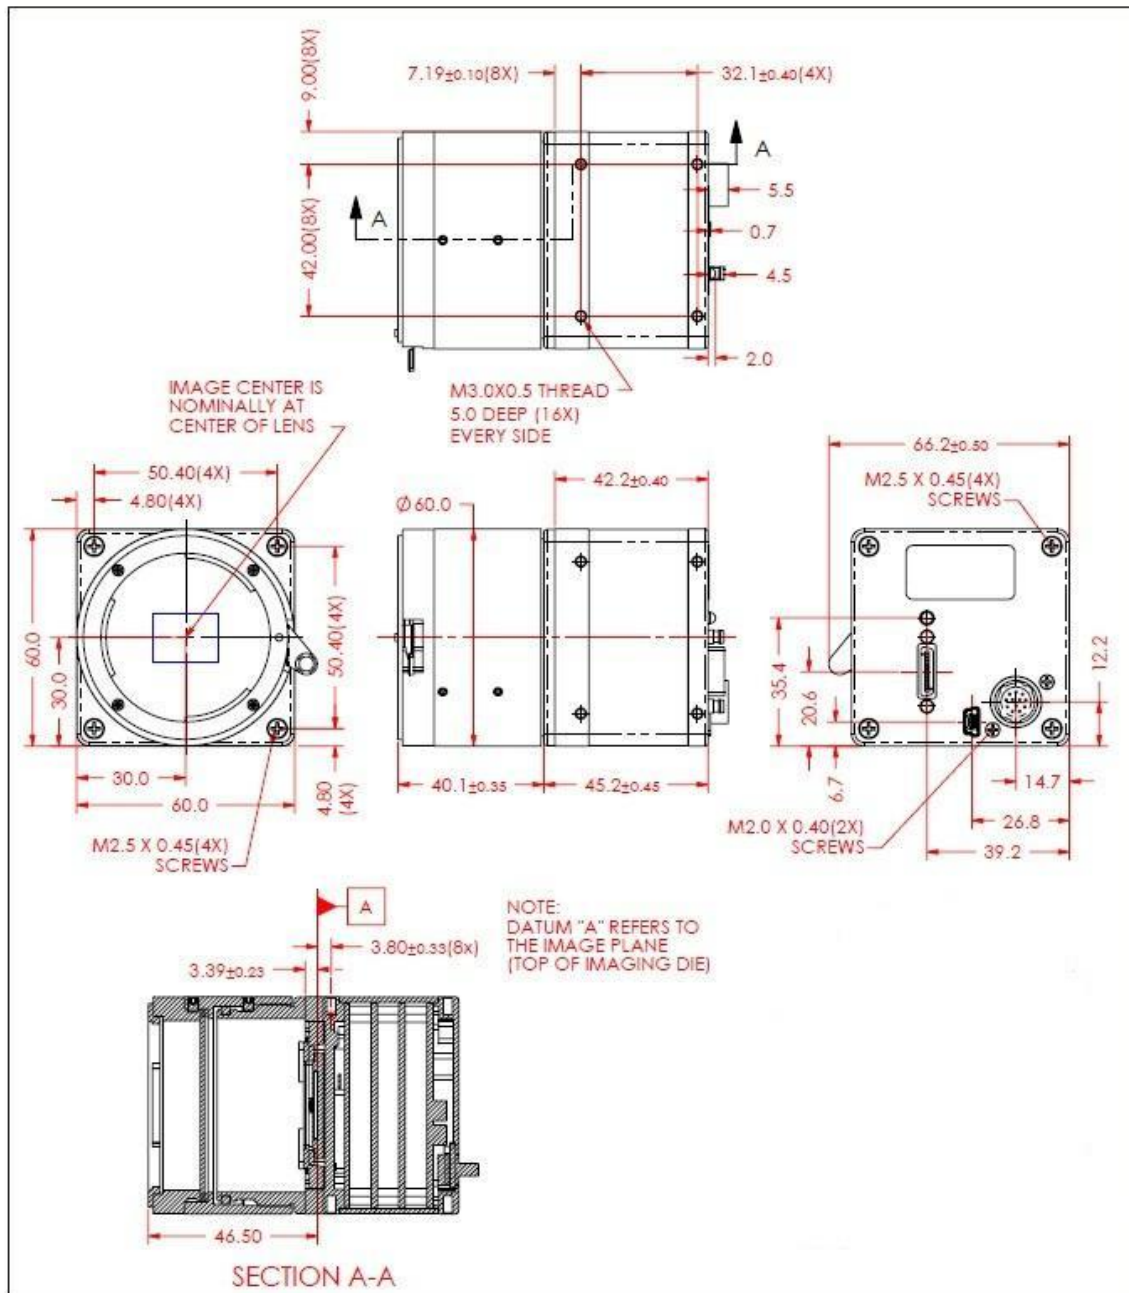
a – F-mount camera link output – dimensional drawings for ICL-B3320, ICL-B4821 and ICL-B6620.
